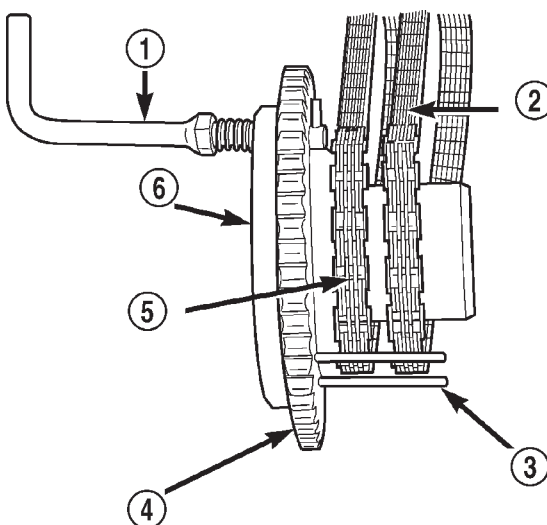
Using Special Tool 8515 to Hold Chains to Idler Sprocket.
